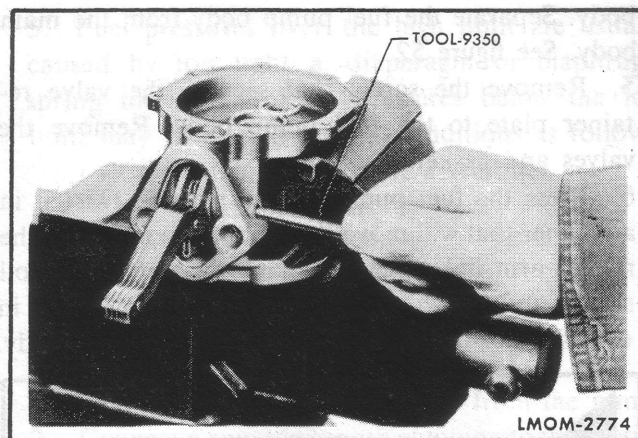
Hold Arm Assembly in Place with Tool 9350.
